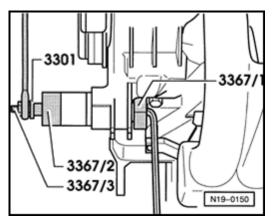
Pressing In Bearing Bushing In Bracket Until Stop Using Compensation Piece 3367/1, Thrust Piece 3367/2, Socket Head Bolt 3367/3 And Hex Nut From Assembly Tool 3301
